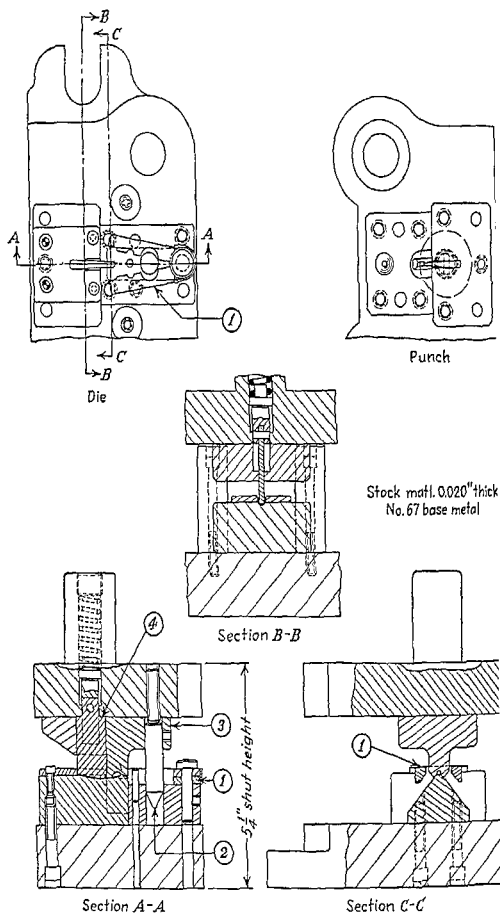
Finish-curl die for pen clip. (Harig Mfg. Corp.)
